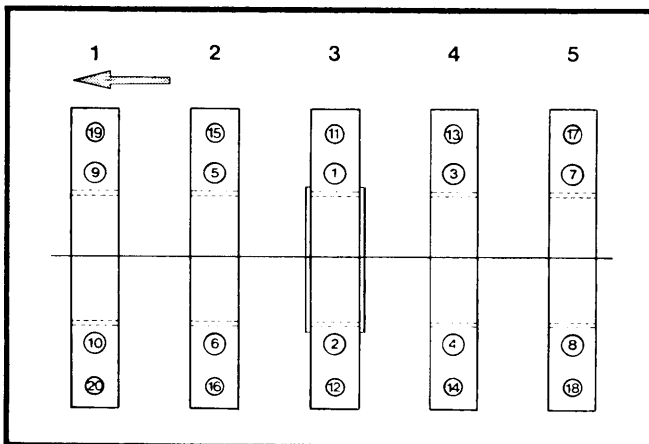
Crankshaft Main Bearing Tightening Sequence
